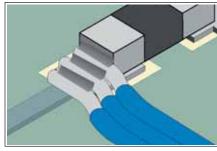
Not Recommended Multiple wires overhanging pad edge.
